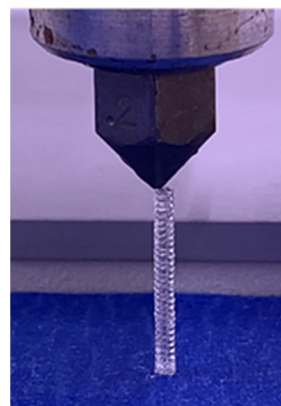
Rod-shaped implant loaded with capsaicin being extruded from the 3D printer nozzle.
